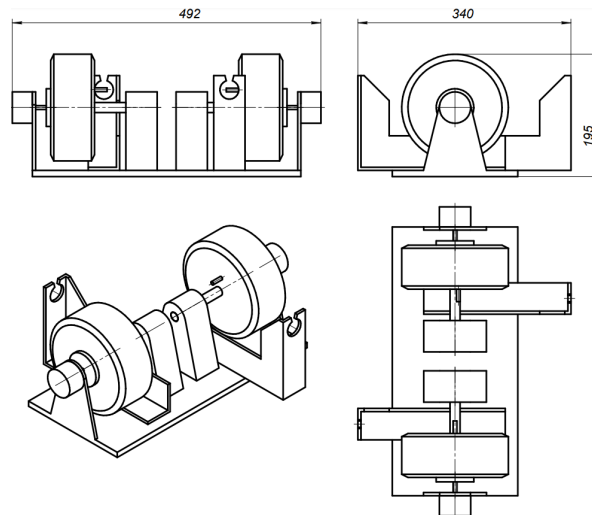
Drawing of a device with drives for the gearbox and brake pedal.
